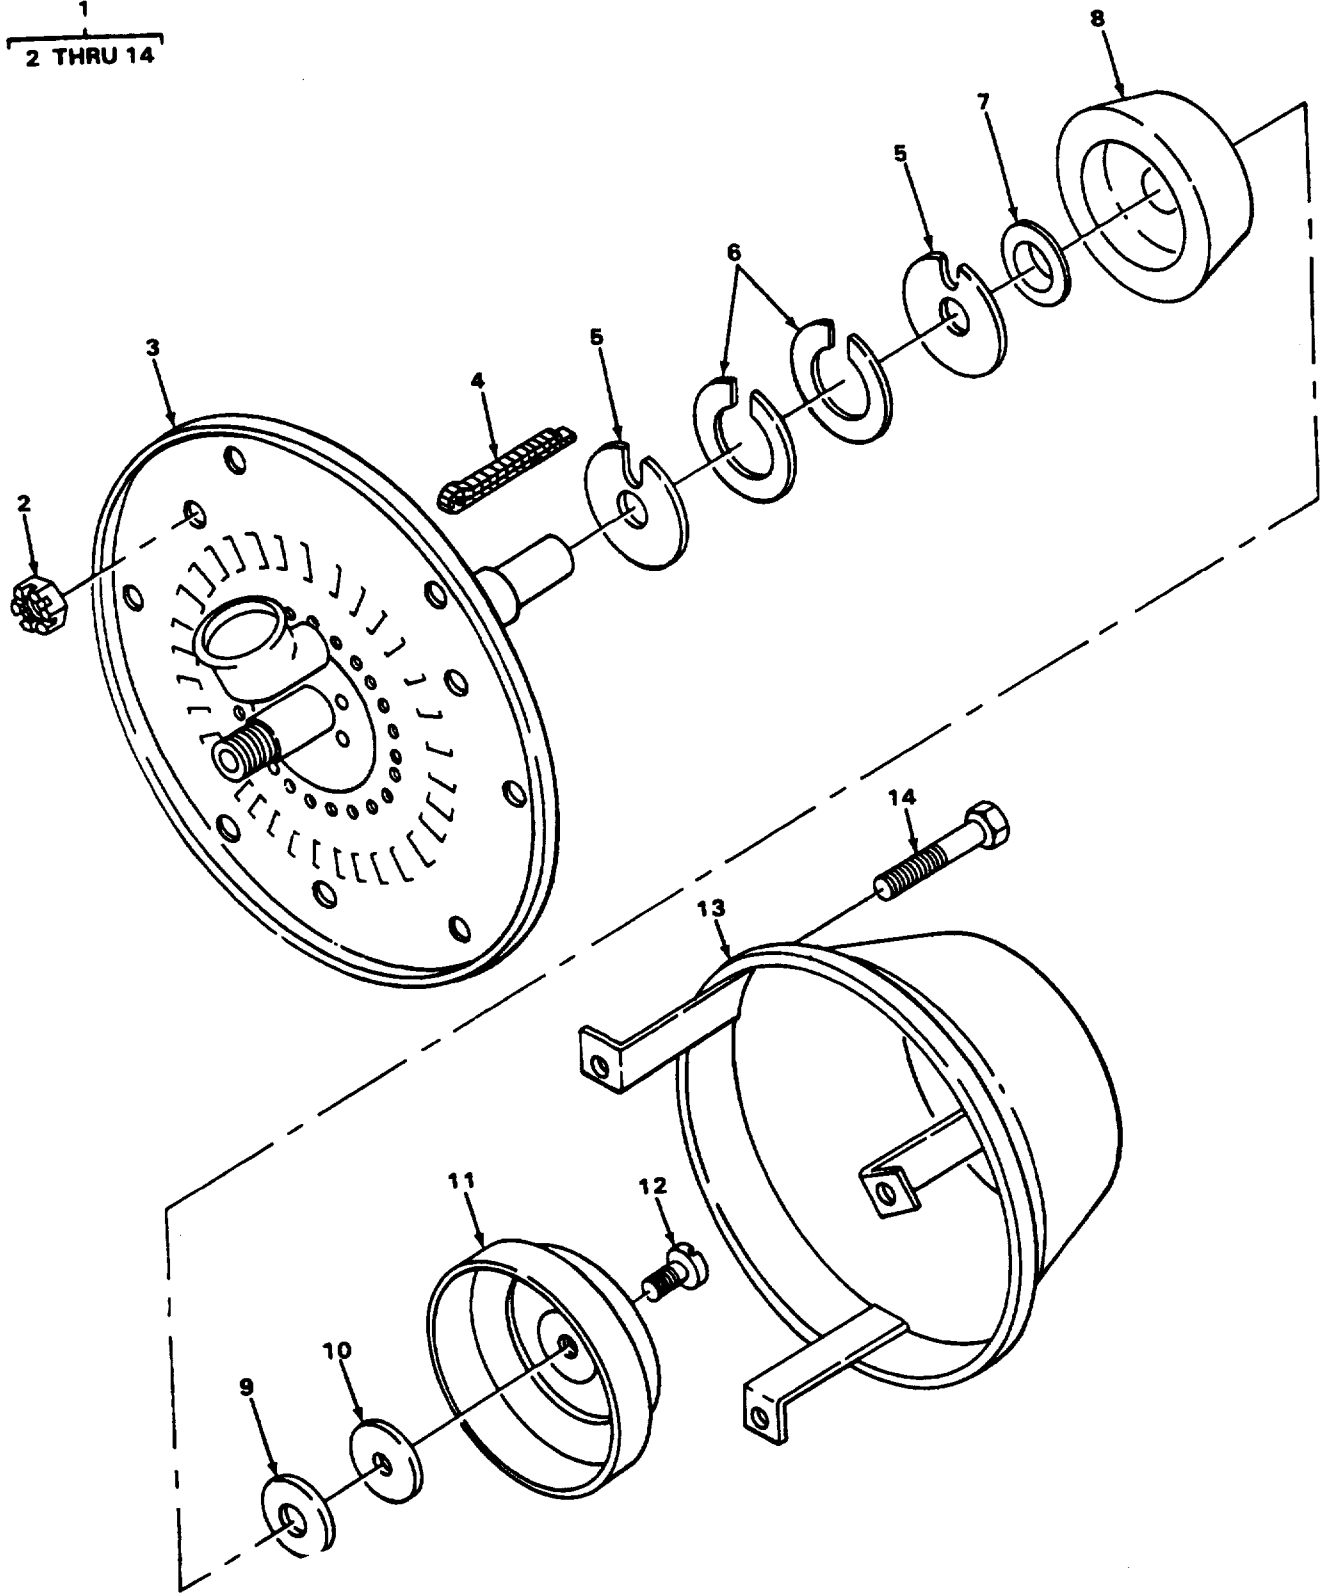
STEWART WARNER MODEL BURNER ASSEMBLY.
